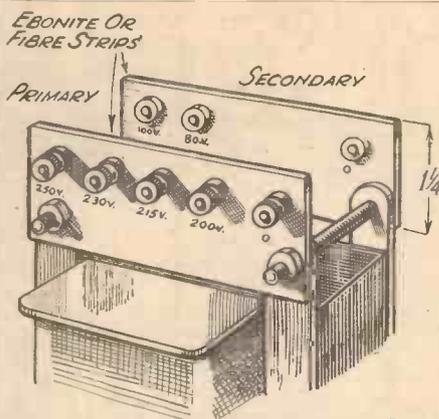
This sketch shows a simple method of arranging terminal connections for the mains transformer.
